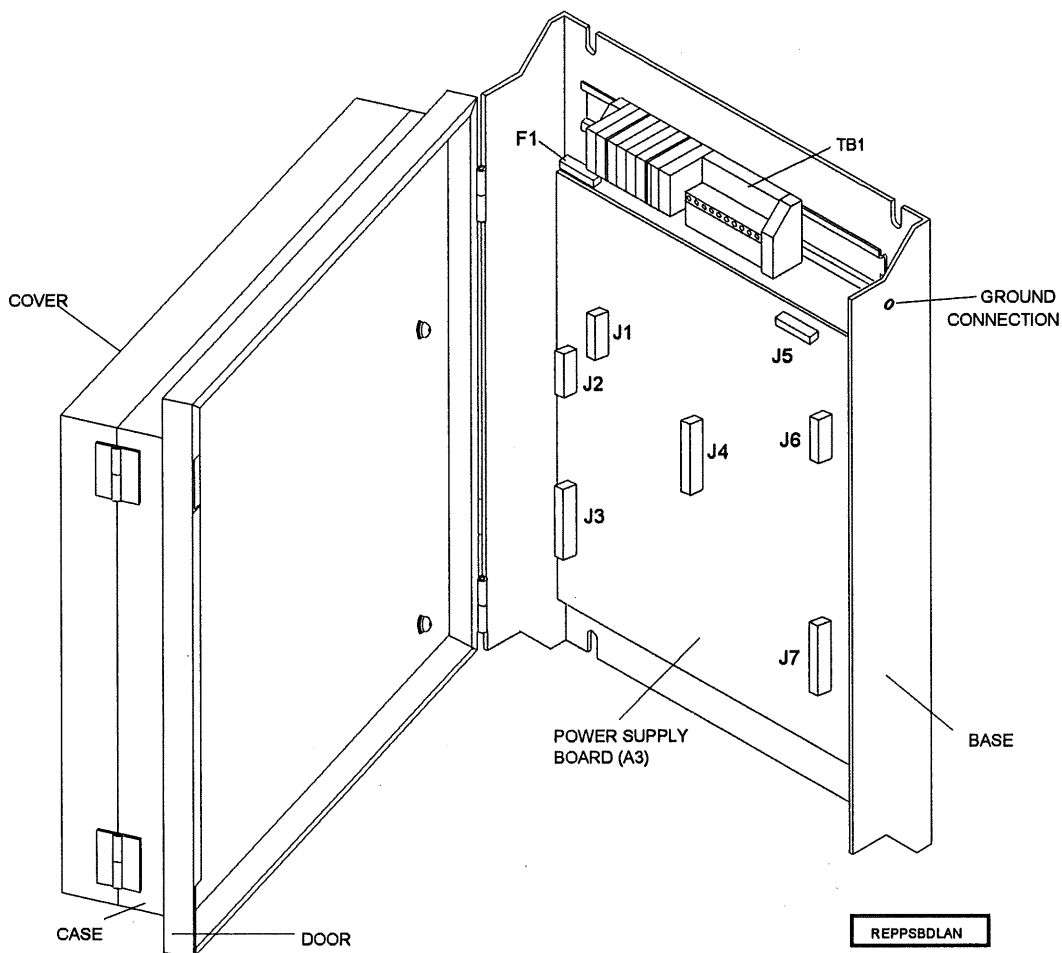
REPLACING POWER SUPPLY BOARD
